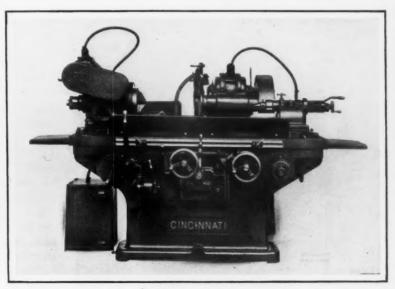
Cincinnati Completely Motor-driven Universal Grinder
